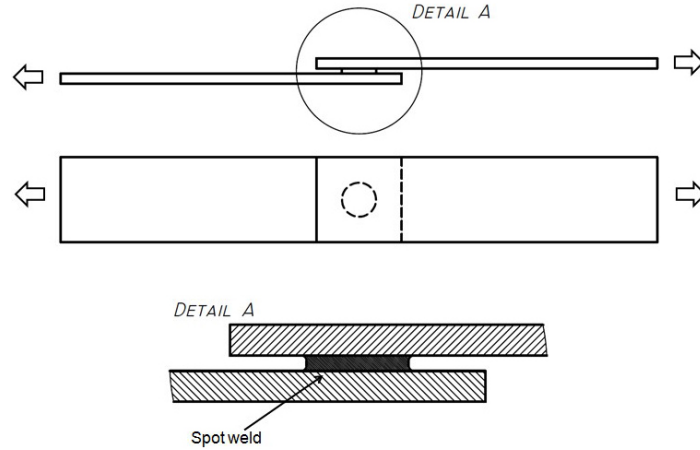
Scheme of the specimen with spot weld.
